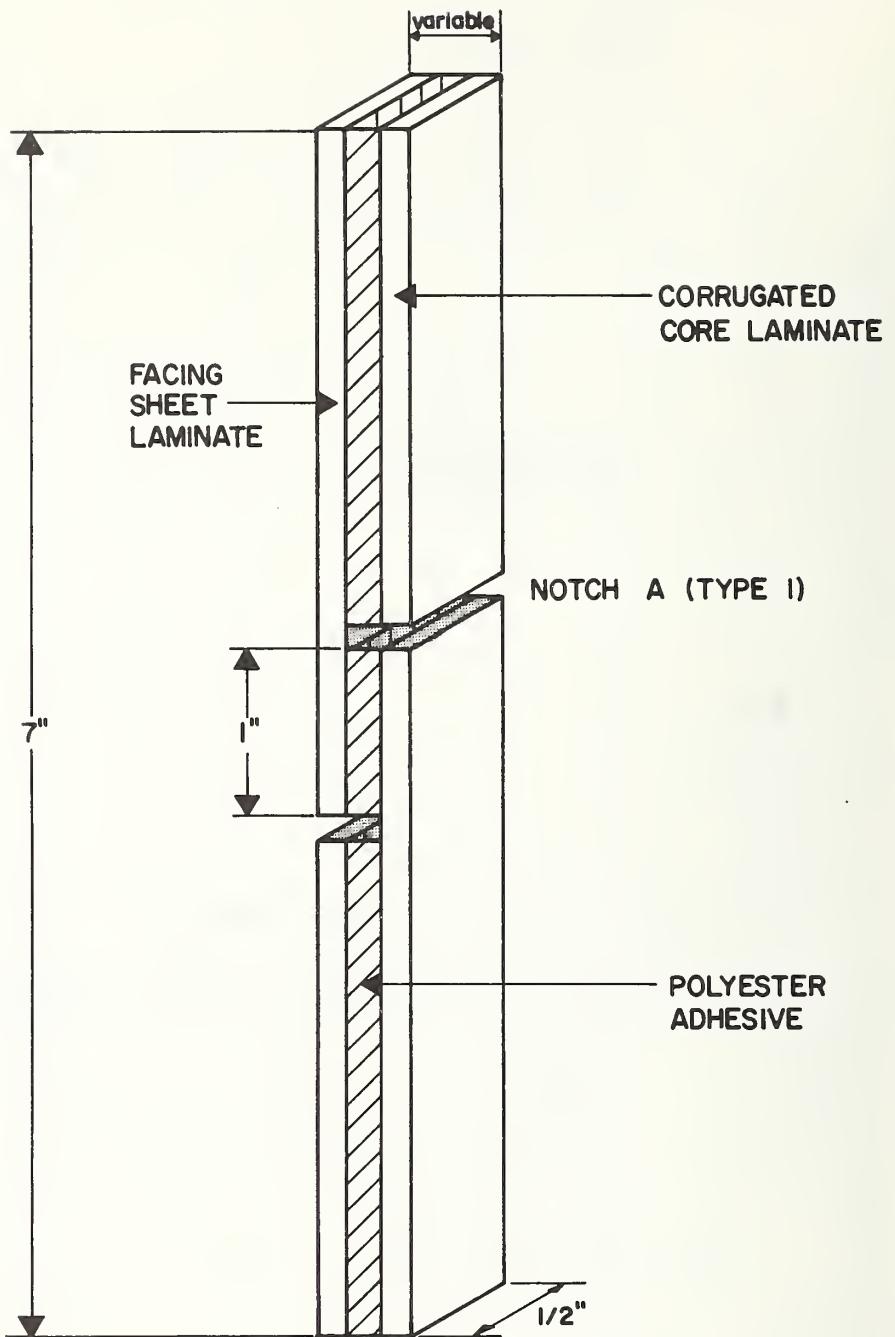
Adhesive bond specimen with notch type 1.
